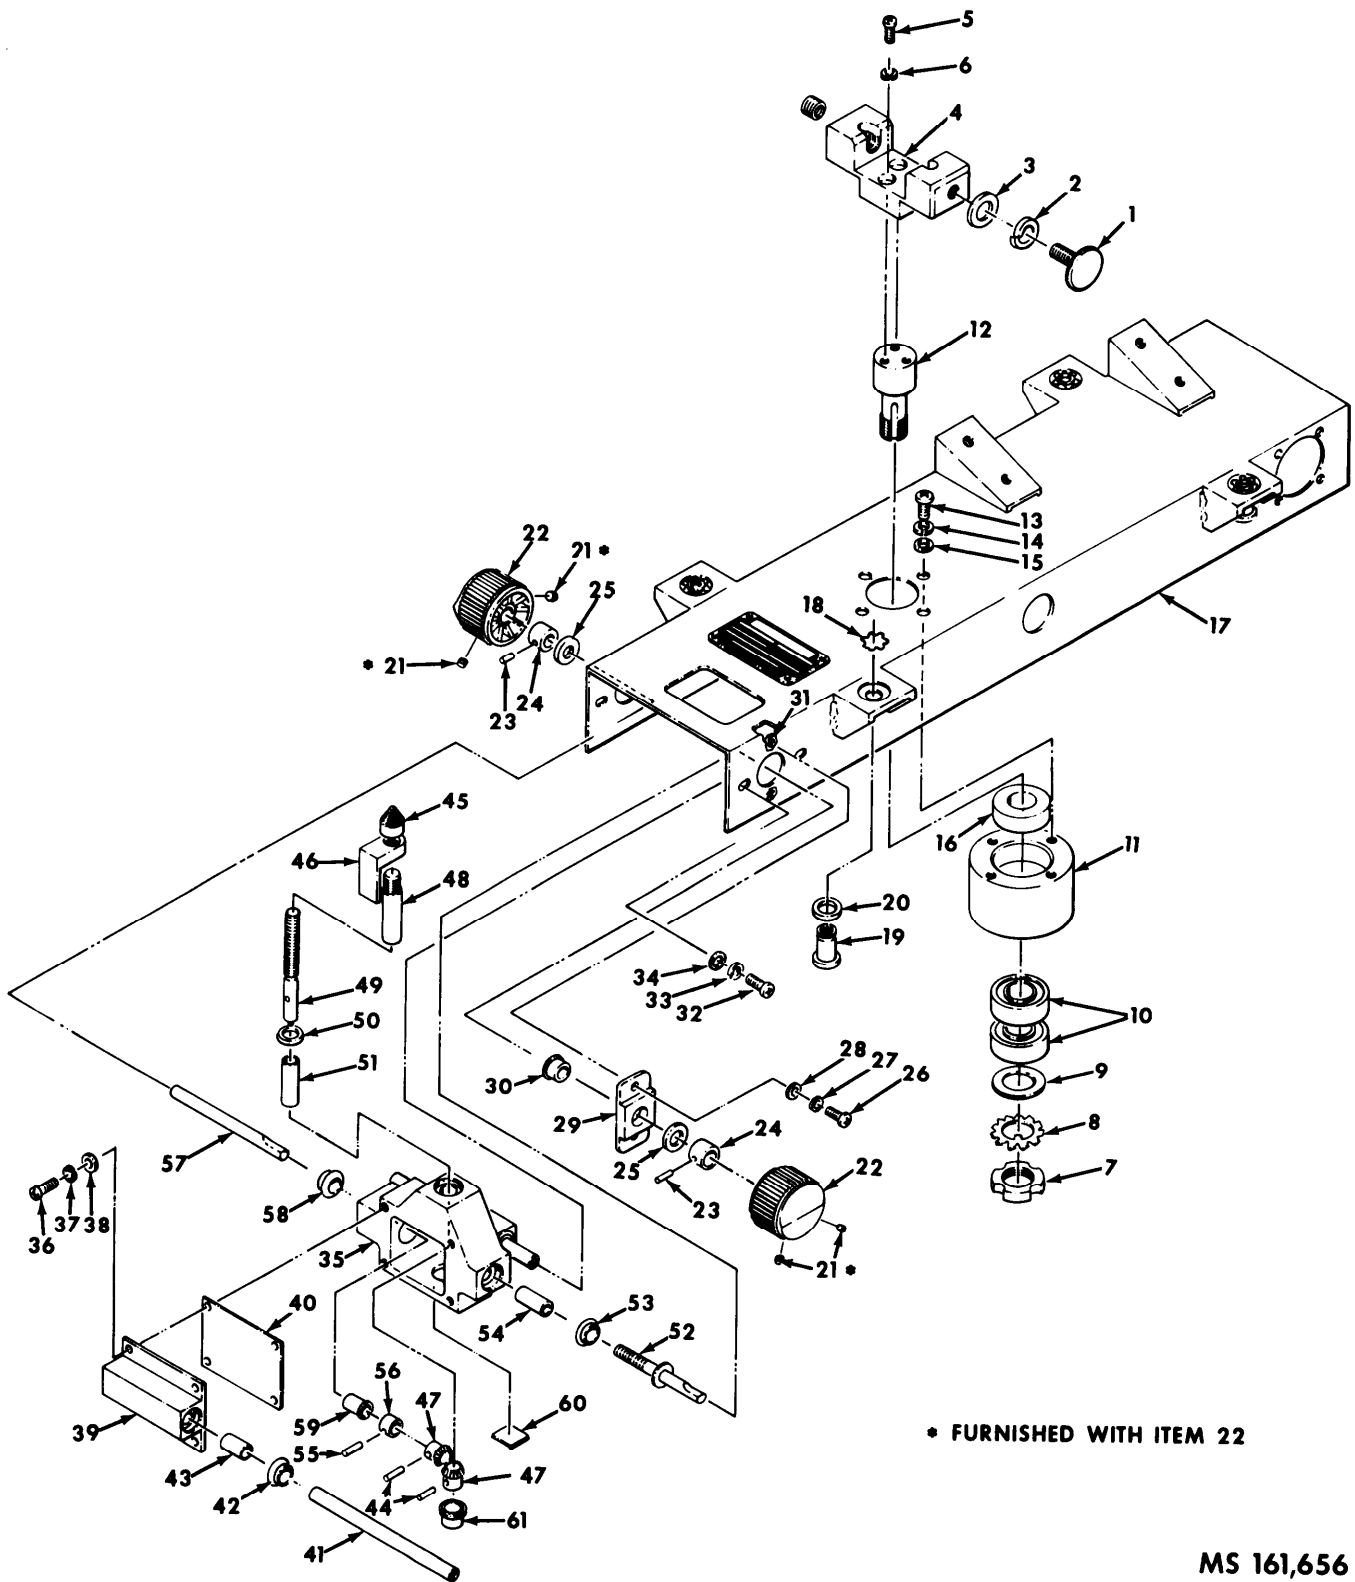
Optical alignment fixture base (10278309) disassembly and assembly
